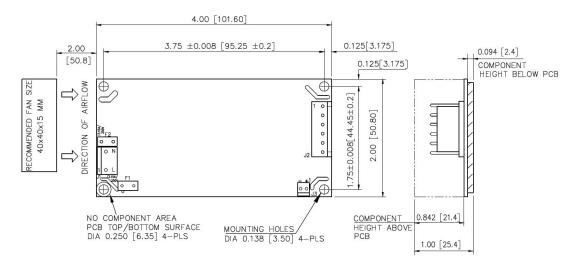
Mechanical Drawing - Screw Terminal (Option 1)
